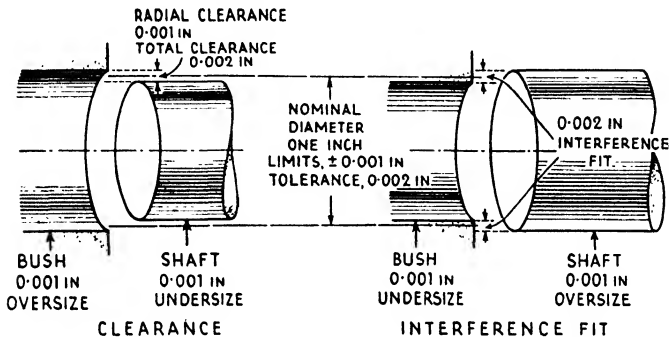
TWO SIMPLE EXAMPLES TO ILLUSTRATE THE MEANINGS OF THE TERMS "LIMITS," "TOLERANCES," "FITS," AND "CLEARANCES"
